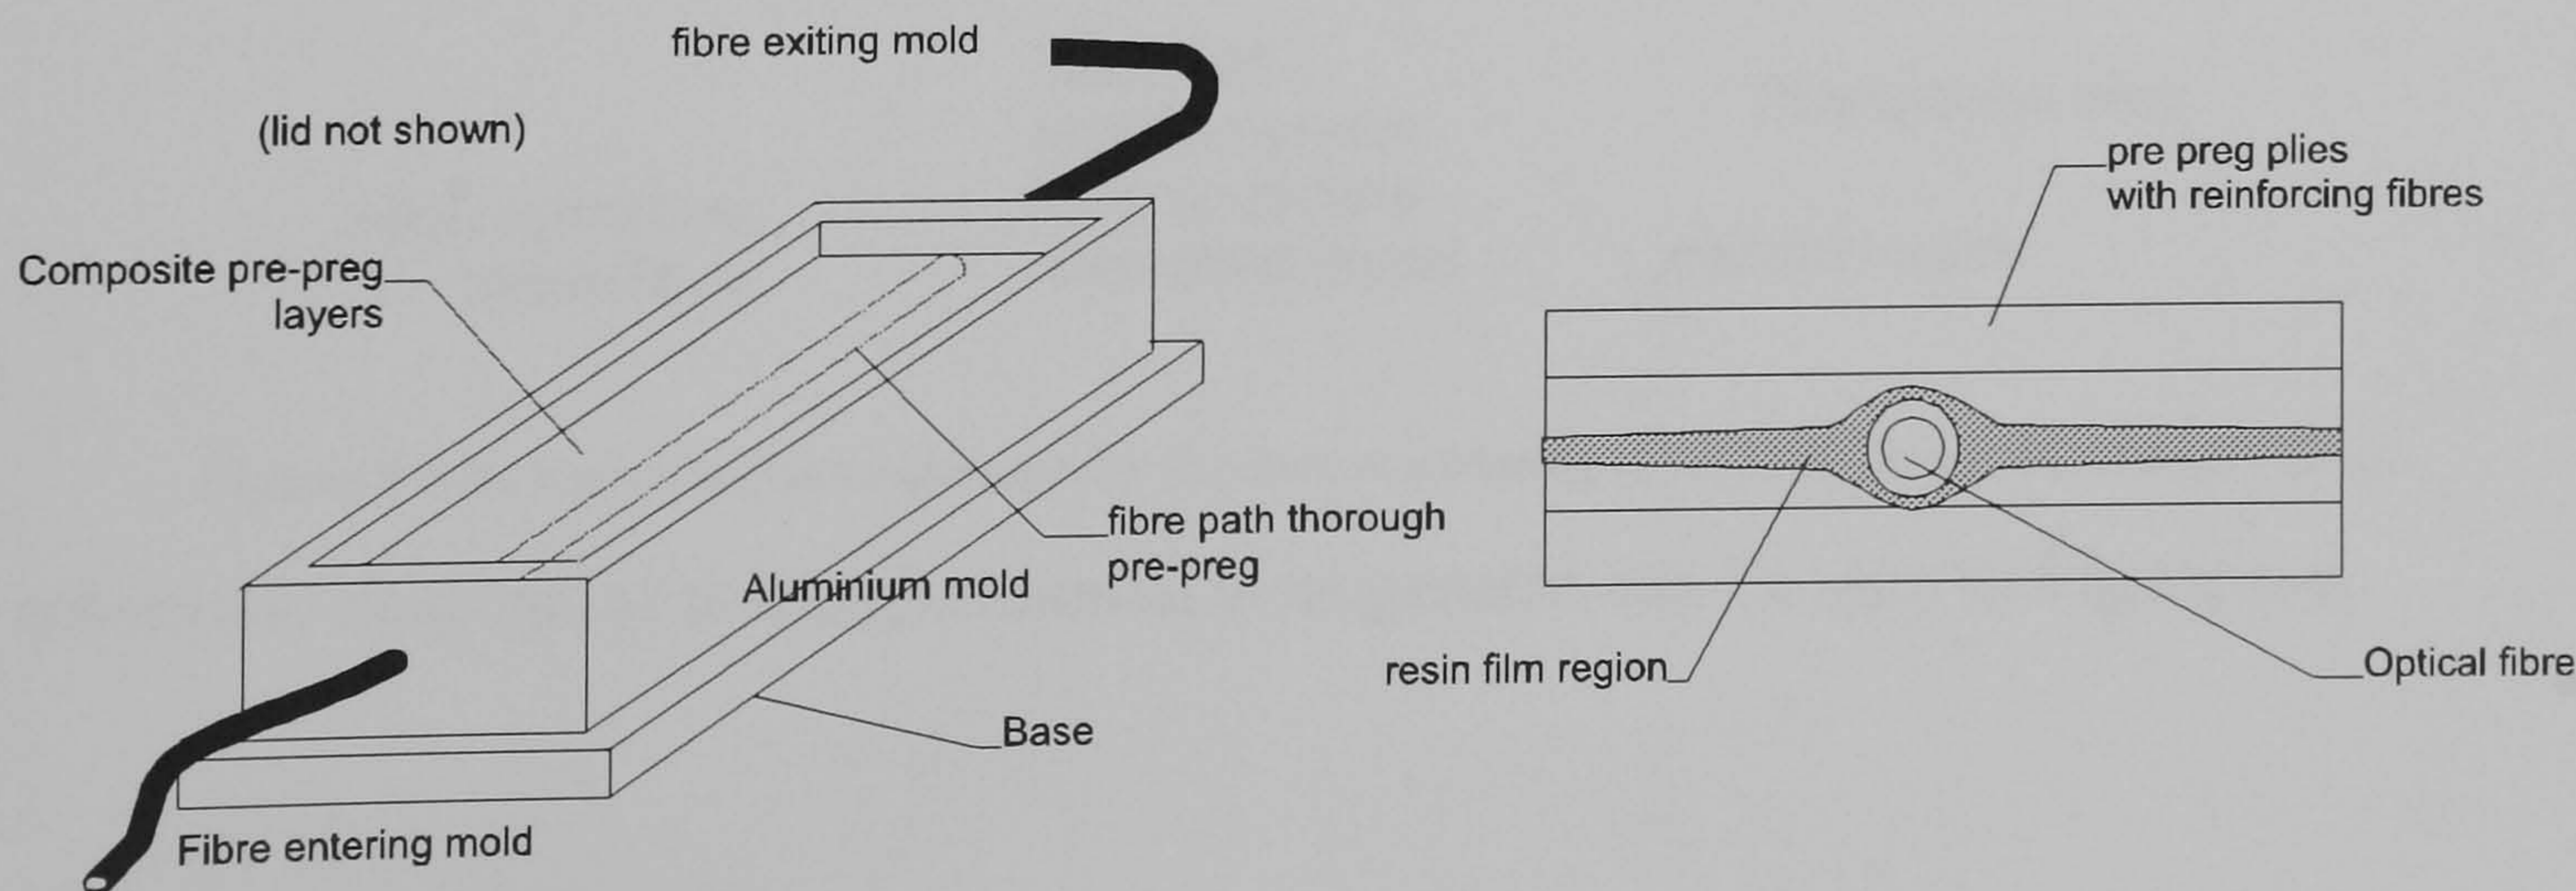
Representation of single specimen composite mould and composite/sensor layout
